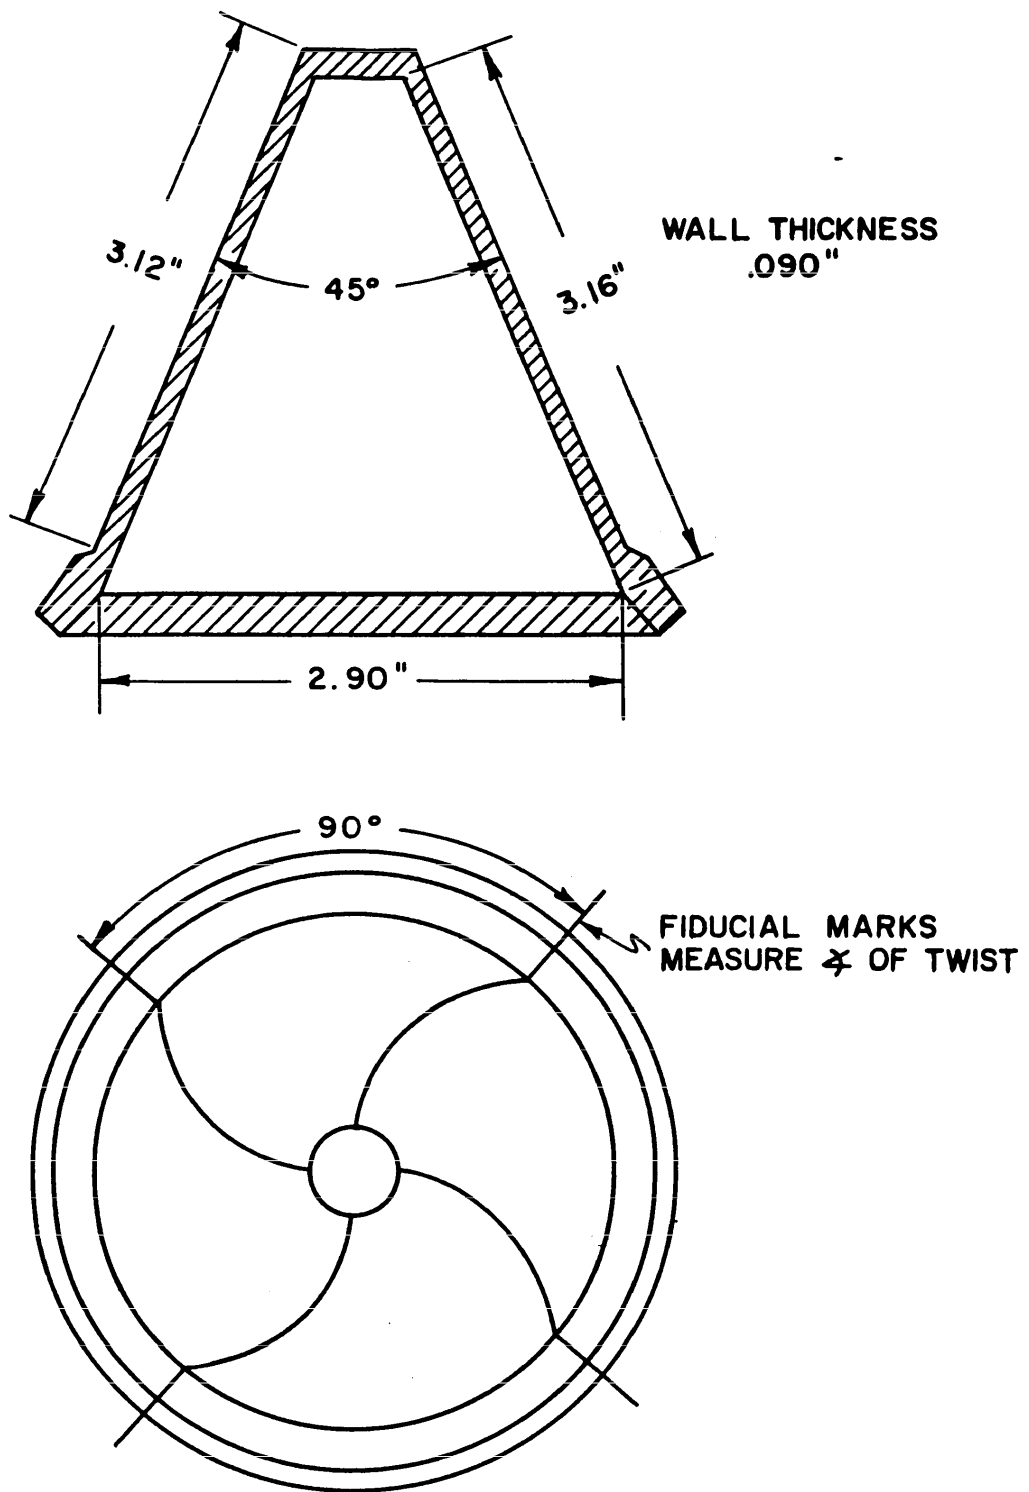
CONE DIMENSIONS OF THE CRAFT LINER SERIES
